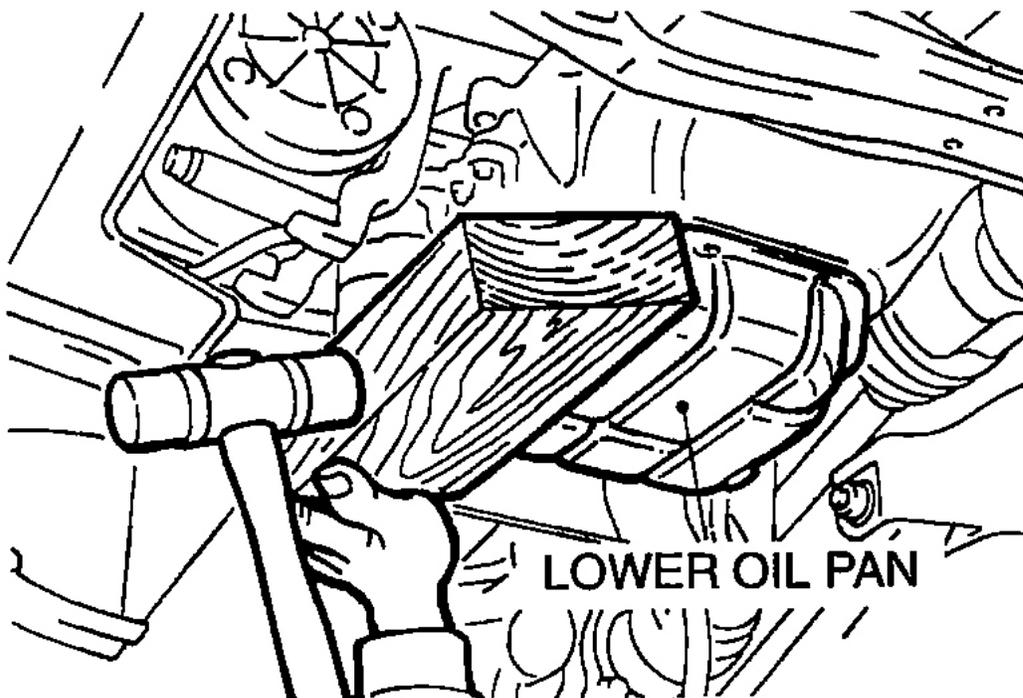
Removing & Installing Oil Pan And Oil Pump
